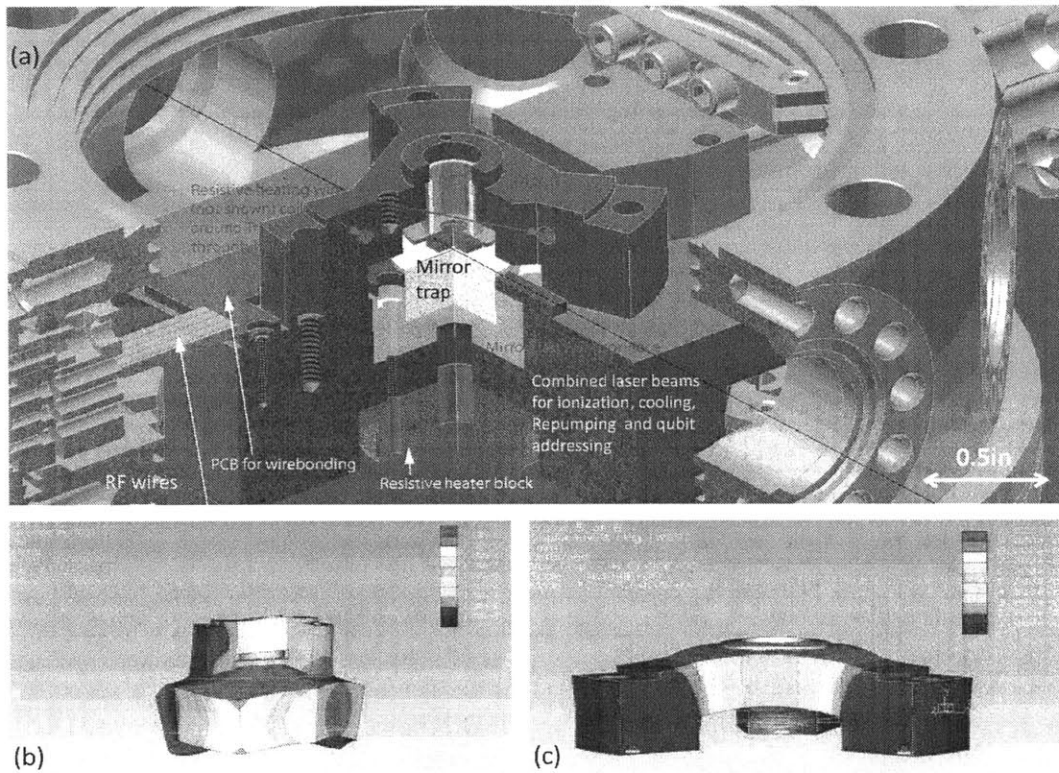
Assembly design of the cavity trap system. (a) the assembly design. The base plate holding the system is shown mounted in a 4.5 inch vacuum chamber via groove grabbers, with Vespel SP3 spacers in between. The mirror trap packaged with an adapter is shown mounted at the center of the base plate. The upper cavity mirror connected to a piezo-electric tube (pzt) is aligned with the mirror trap via a tripod mounted on the base plate. (b) and (c), the two normal modes of the base plate and cavity tripod system, which strongly couple to the cavity length. The resonant frequencies are 23.9 kHz and 36.4 kHz, respectively.
